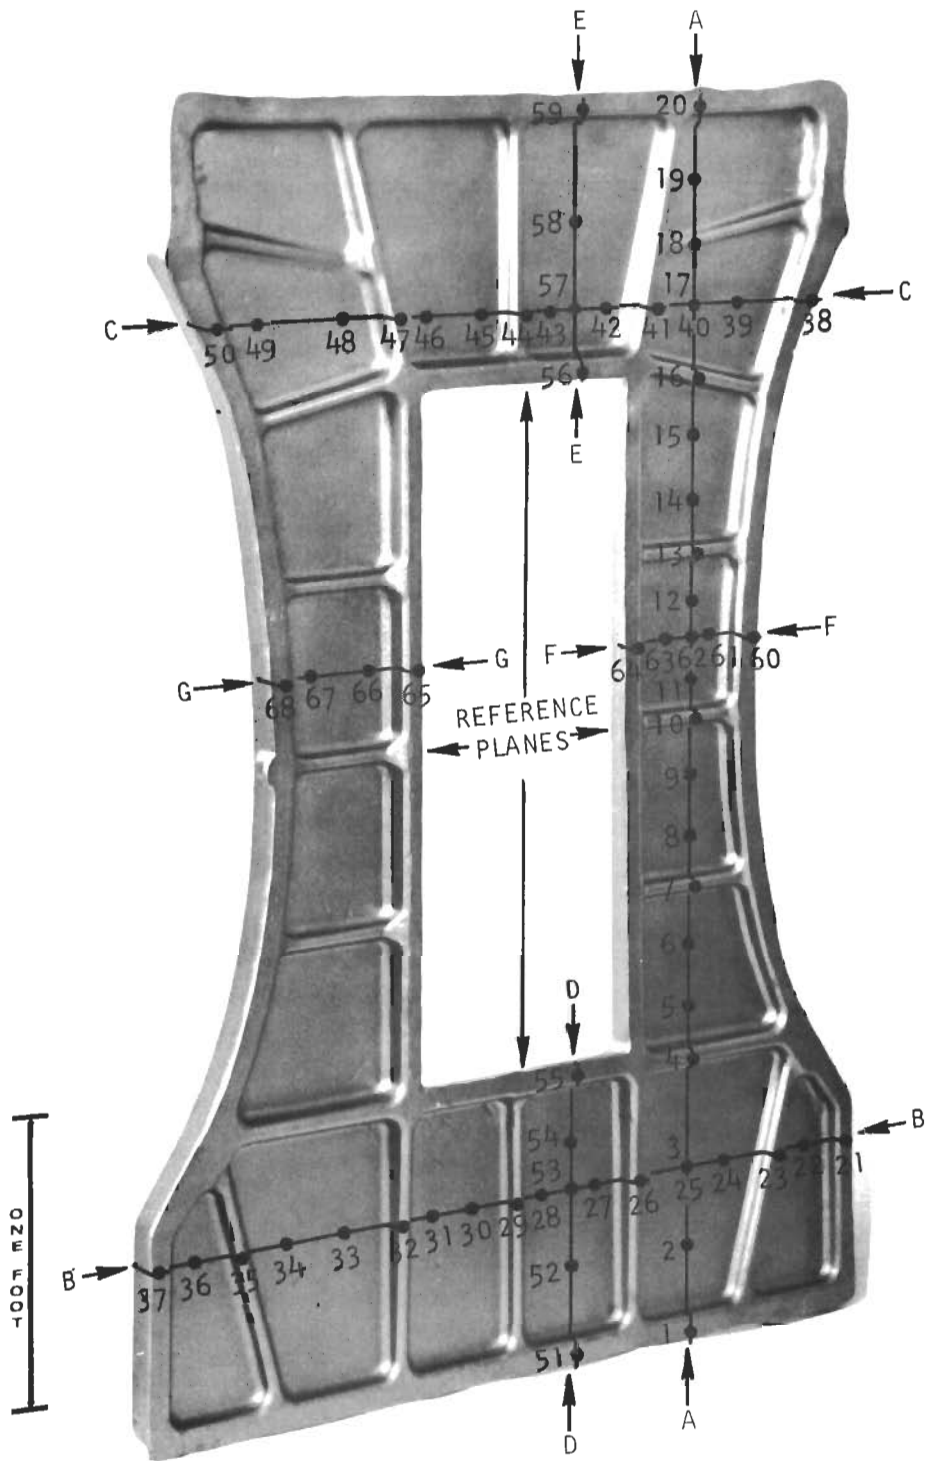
Locations of Inspection Section Planes and Data Measurement Points Employed for Dimensional Evaluation of Rib Height and Web Thickness Characteristics of Ti 6Al-4V Bulkhead Forgings.
